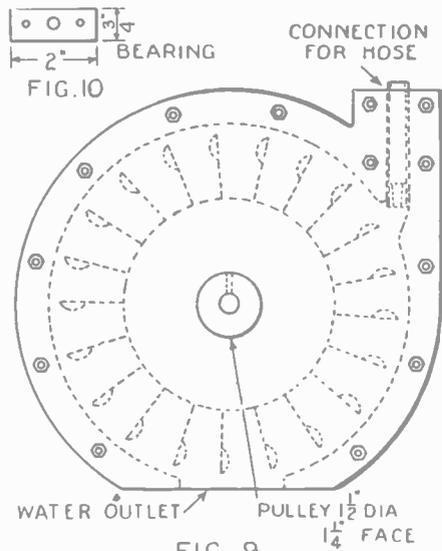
Side view of the hydro-motor with dotted profile of the gong and dippers, and the bearing for the shaft is shown in the upper corner.
